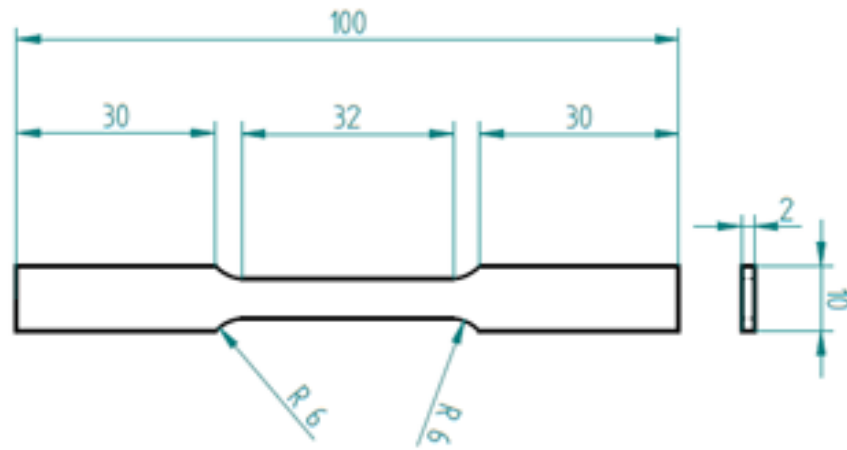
Test Specimen dimensions according to ASTM E8/E8M-16A
